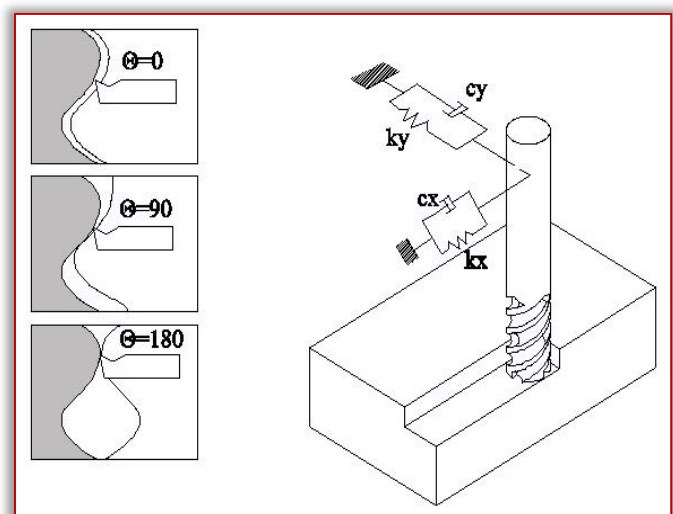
Regenerative chatter in milling. Initial tool deflection copied to workpiece surface is encountered in the next tool revolution
